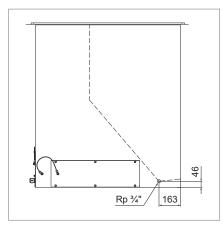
Dimensional drawing for oil/condensate drain (in mm) for oil-proof design and corrosion-protected design for high extract air humidity
